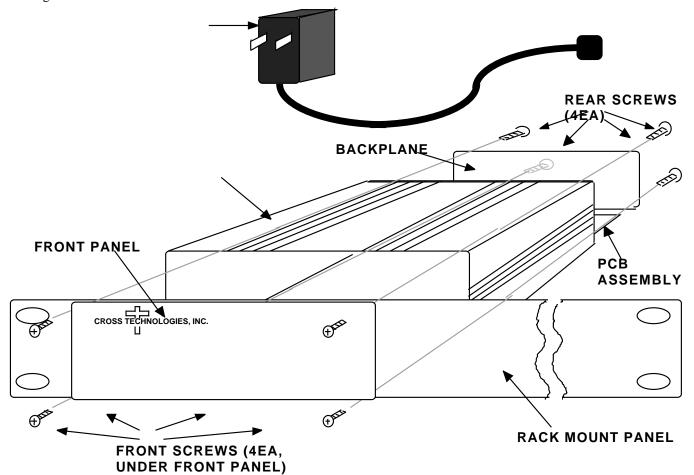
SERIES 2455 ASSEMBLY DRAWING
